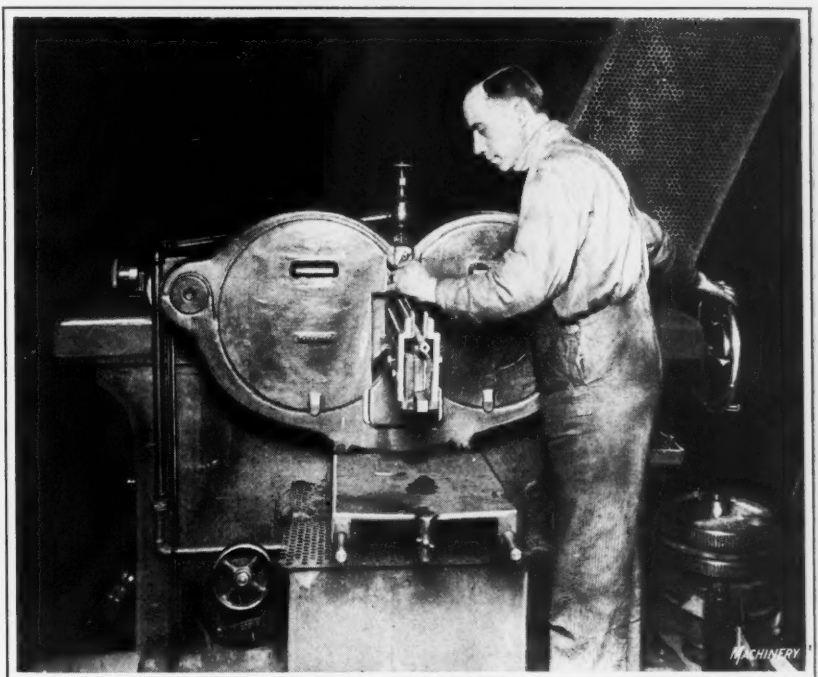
Setting up the Machine, using a Feeler Gage between the Work and One Face of the Fixture
